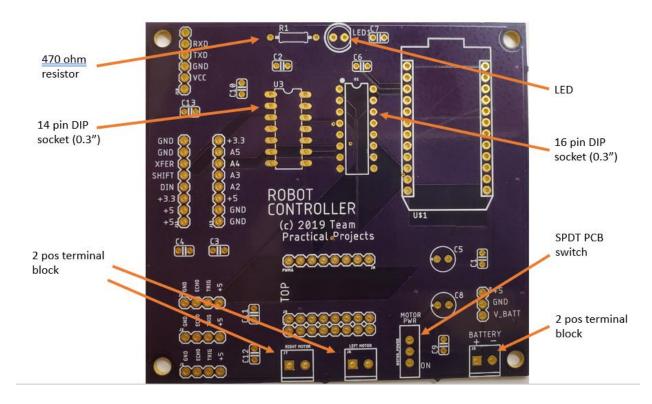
LED/Resistor, DIP sockets, Switch, Terminal Blocks.
